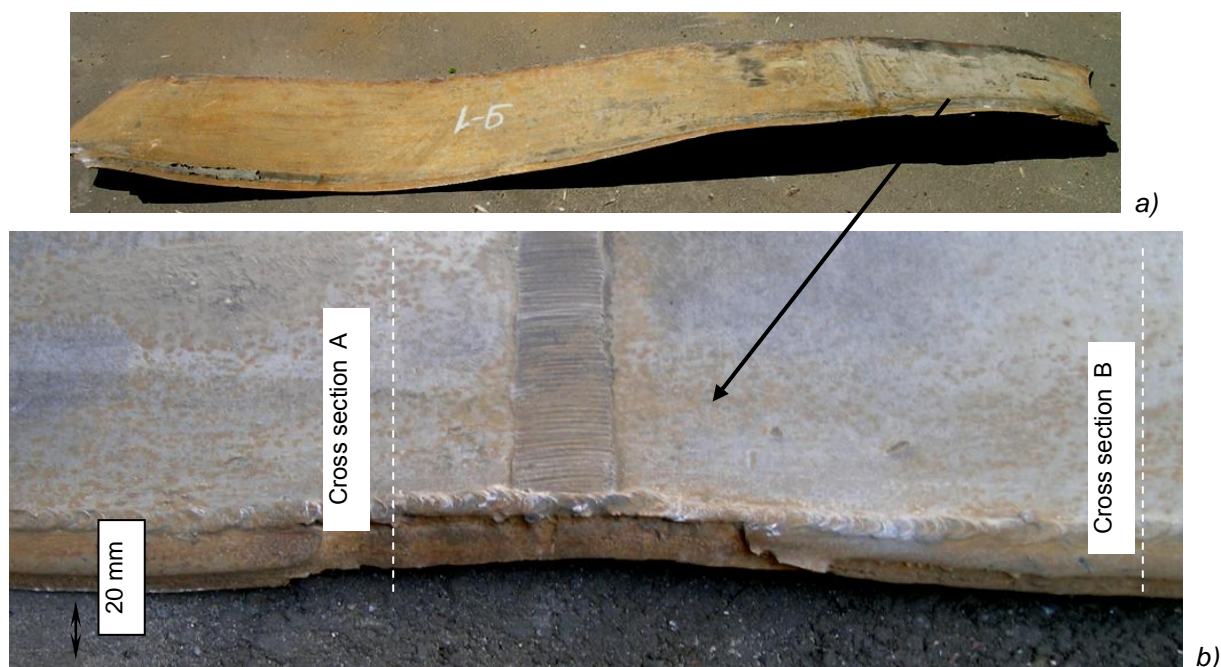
The fragment of the broken pipe C with girth weld joint (templet 9/1): a – appearance; b – region near the fracture edge along the fusion line of girth weld
